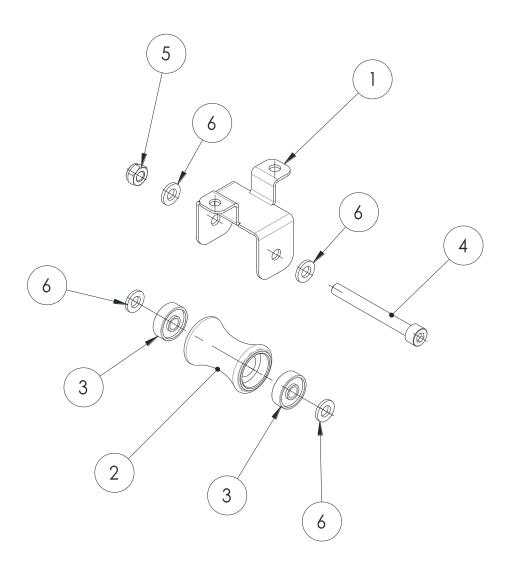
POOL GUIDE ROLLER UNIT
